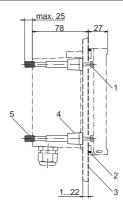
ZU 0275 panel-mount kit, panel cutout 138 x 138 mm (DIN 43700)
